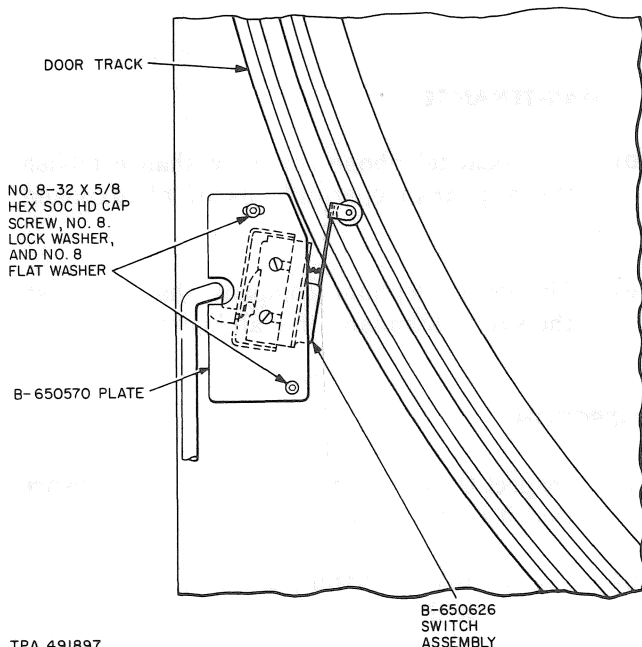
B-650626 Door Operated Micro Switch Assembly
